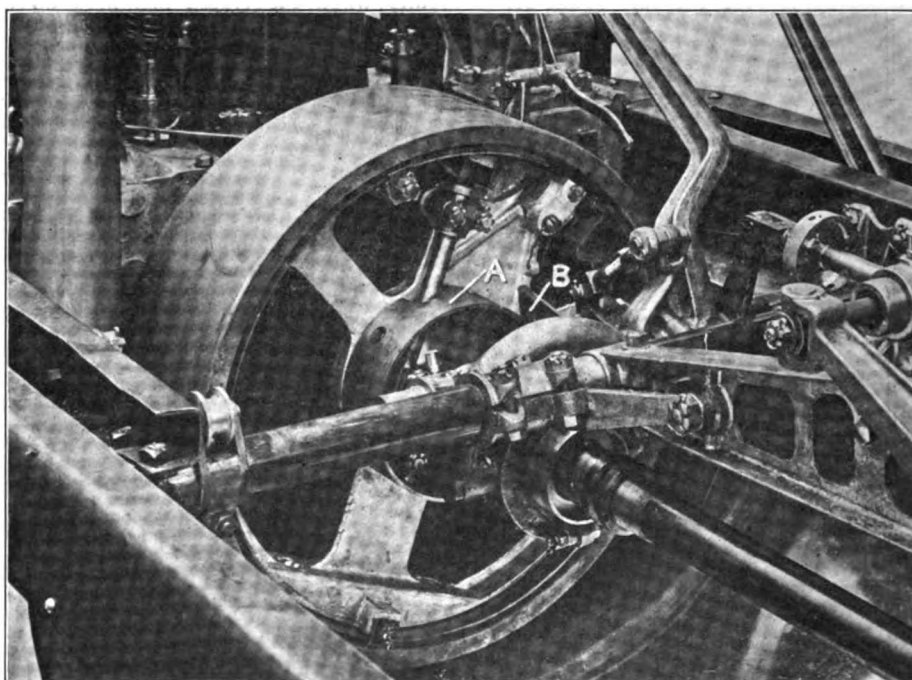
DETAILS OF PEDAL ACTUATED CHADWICK CLUTCH BRAKE
